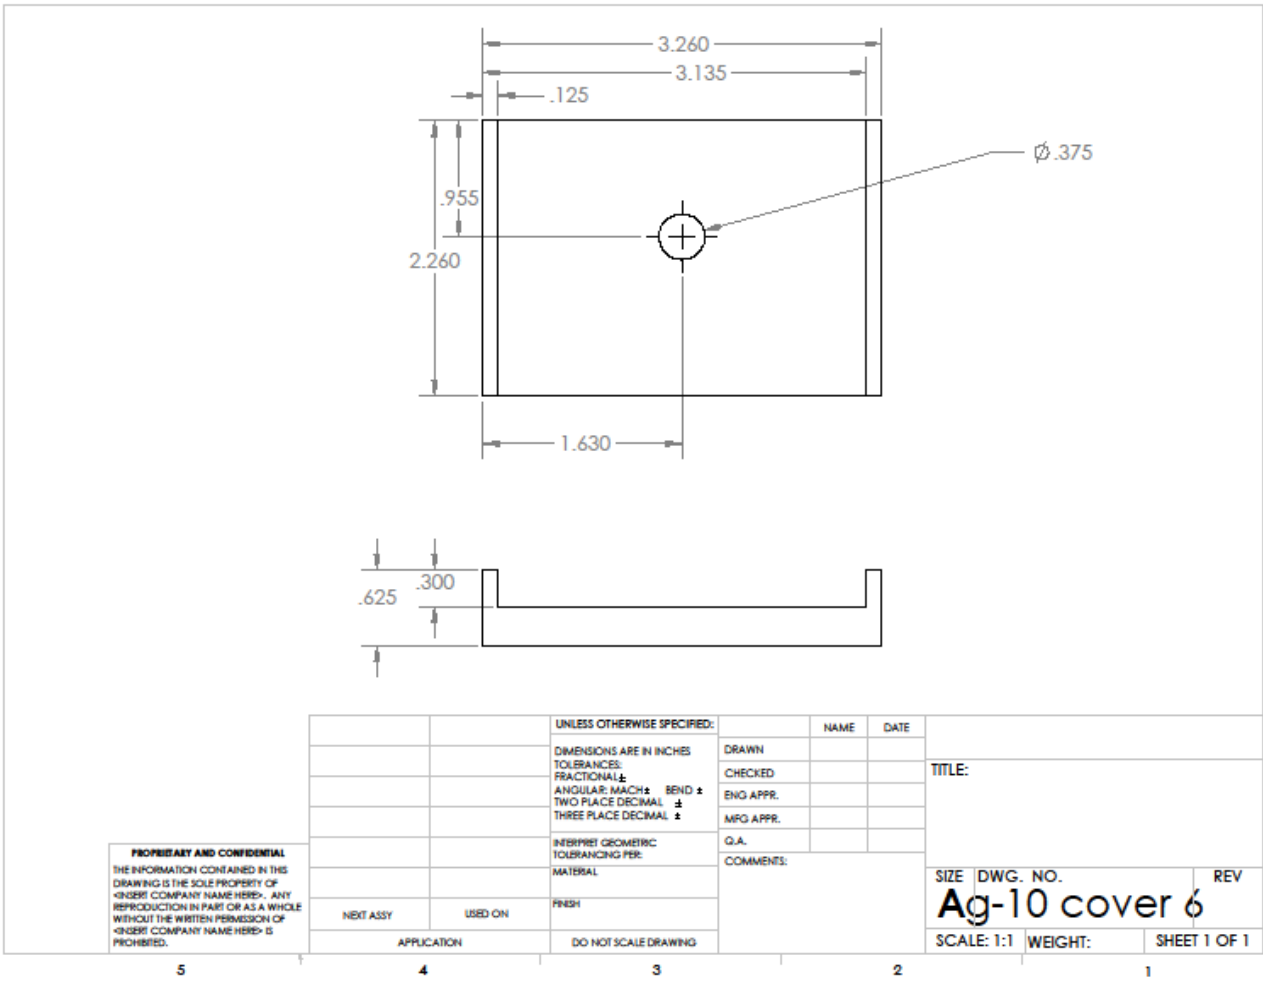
Technical drawing of the G-10 cover board. All dimensions in inches.
